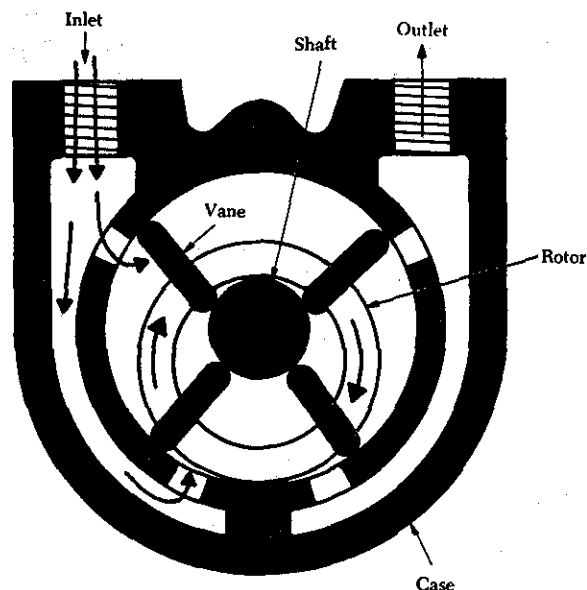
Cutaway view of a vane-type engine-driven vacuum pump.
